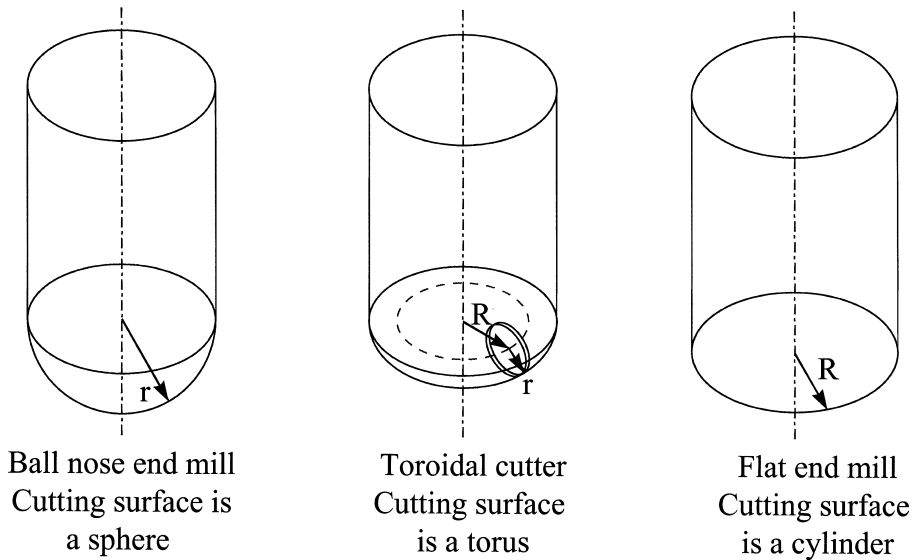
Cutting tools typically used for 5-axis surface machining.
